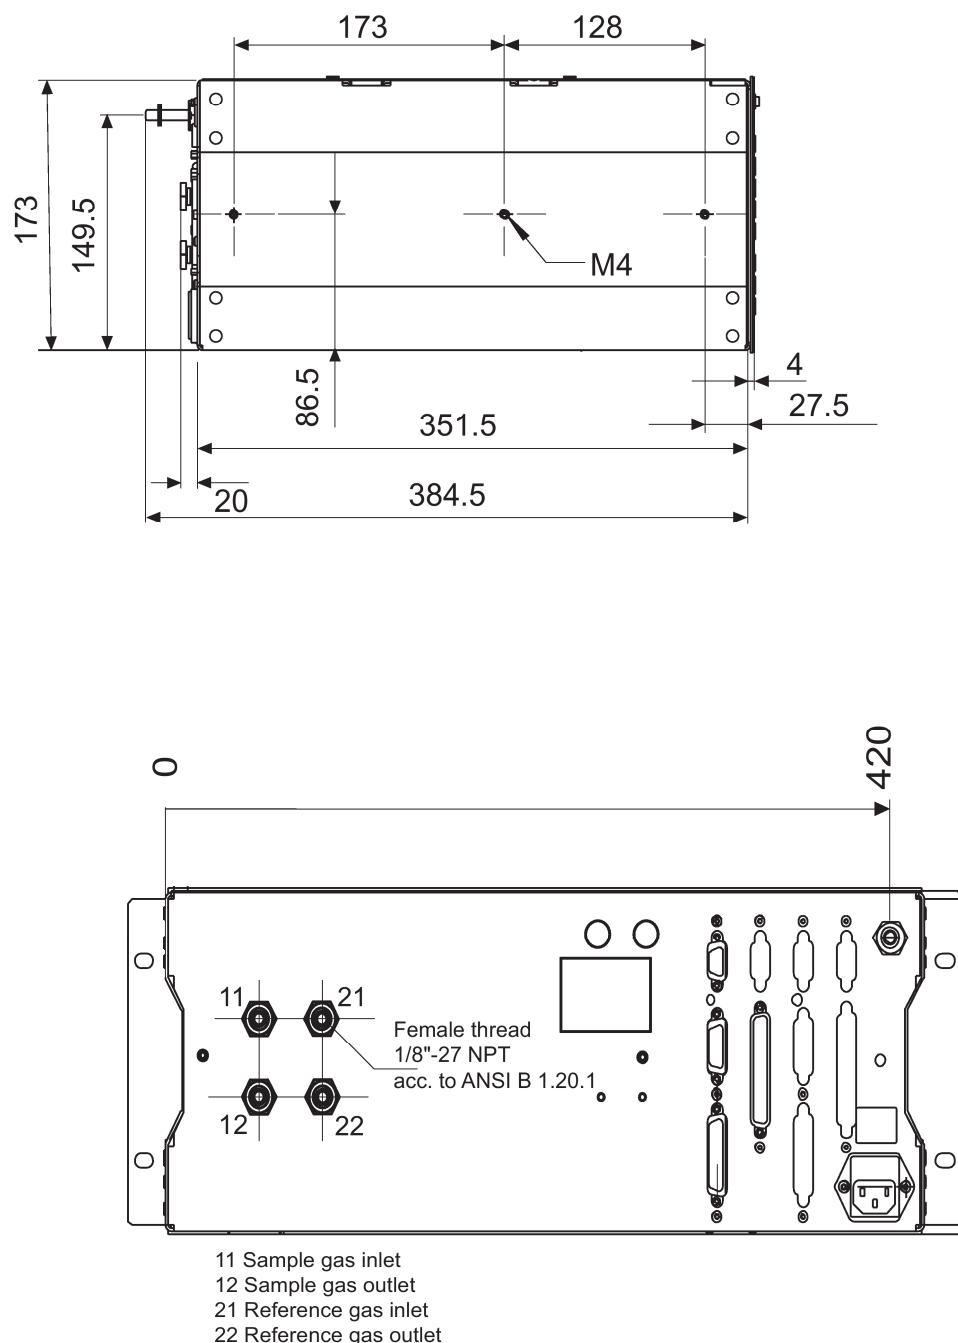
Dimensions for preparing installation of CALOMAT 62E (side view and rear view)
